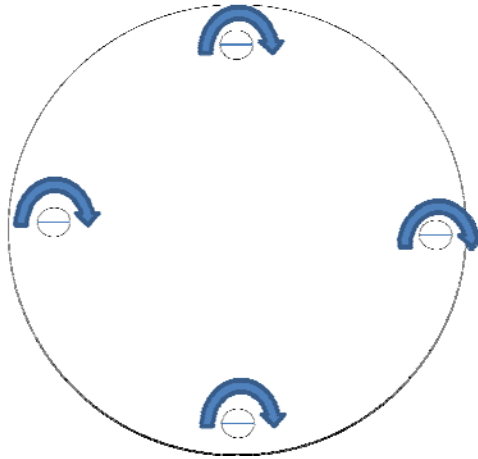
A torque-limiting screw driver applies a torque to each cap-screw to apply pressure to the interface
